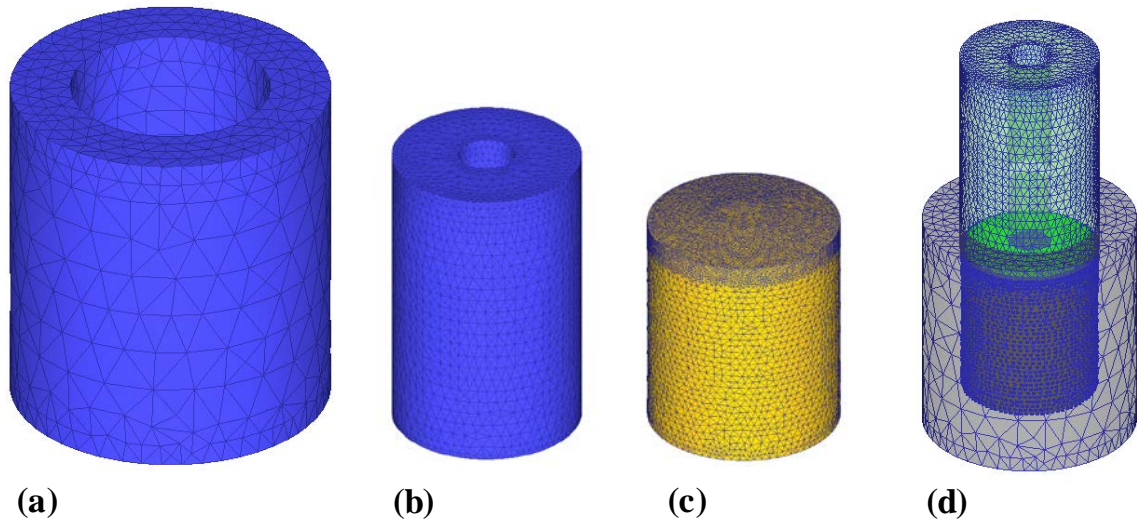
Sketch of the model: (a) matrix, (b) rotating tool, (c) compacted chips billet and (d) assembled model highlighting contact nodes.
